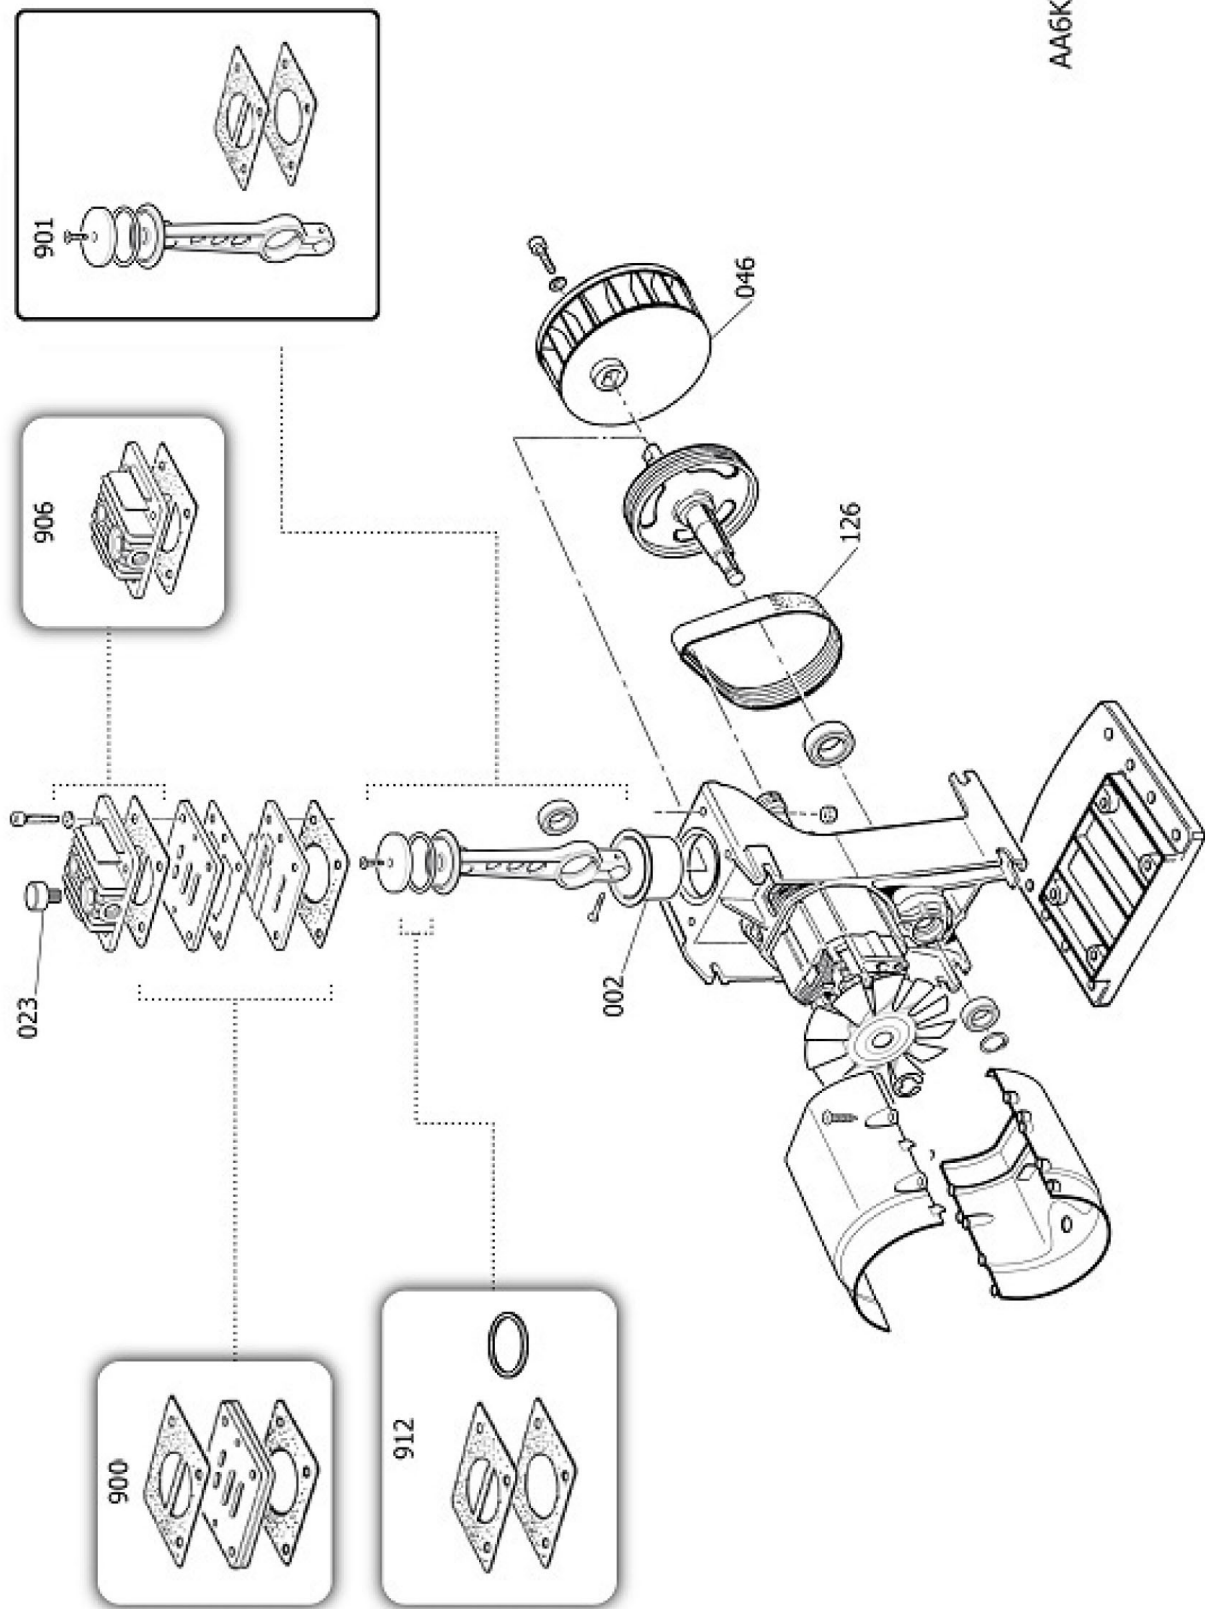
Spare parts drawing 2 MOBILBOY 185 OF E
